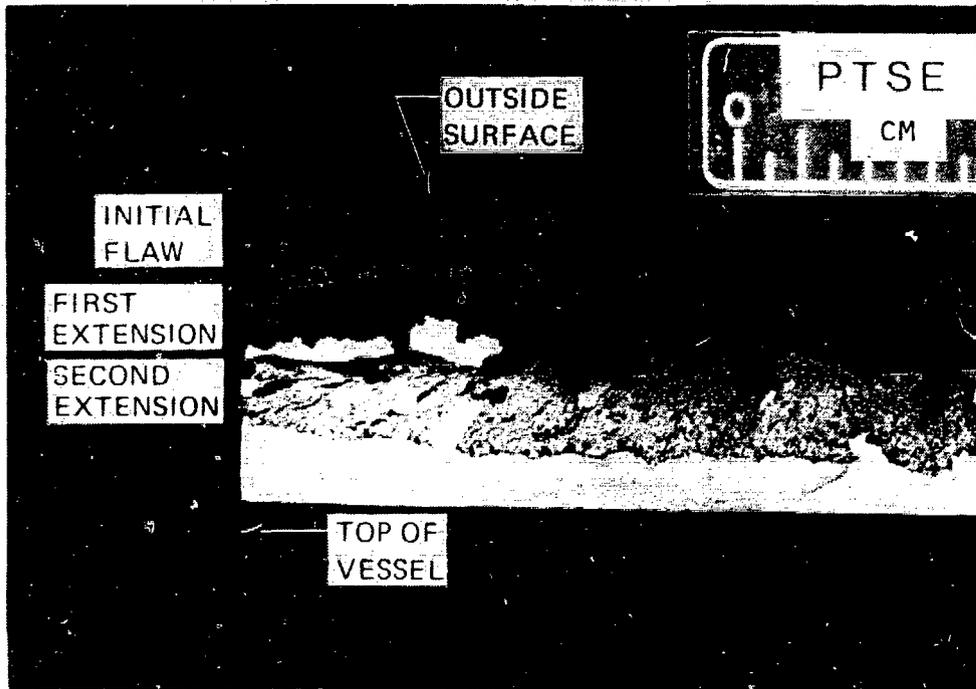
One segment (3B) of the fracture surfaces of the PTSE-1 vessel.
